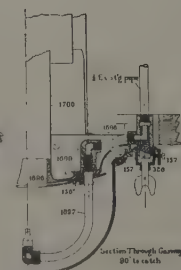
Sections Through Acetylene Wall Lamp No. 1641.
